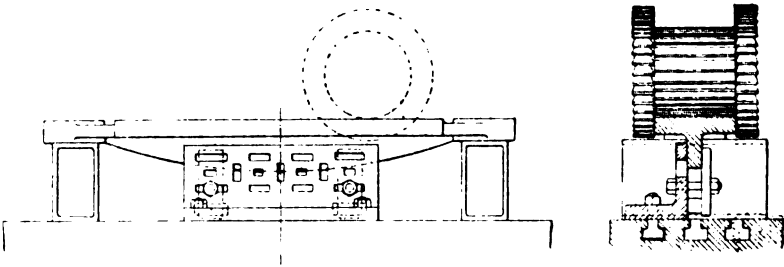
Motion Bar, tooled on Face and Edges with Straddle Mill, while bolted against Angle Plate, and supported on Packing Blocks.
